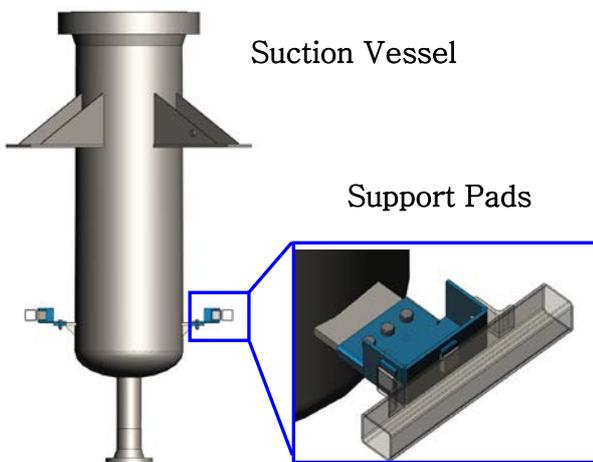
Vessel Mounted High Pressure pump with lower support pads.
